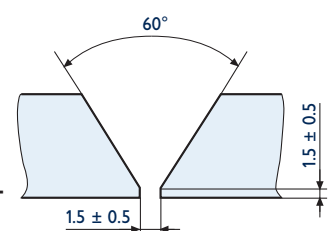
Weld preparation when welding with Cellulosic electrodes
